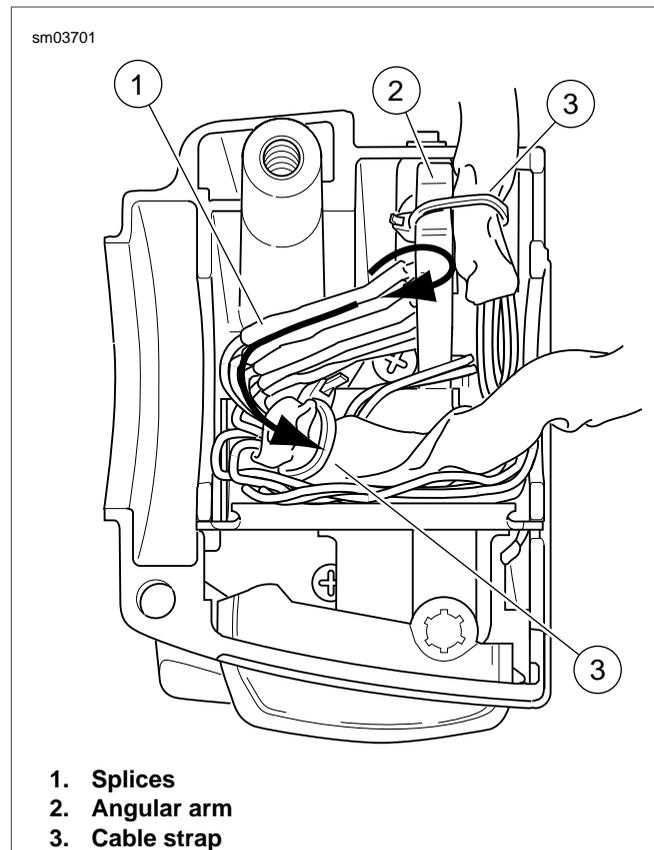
Lower Left Handlebar Switch Housing (With Splices) - Classic/Ultra Models
